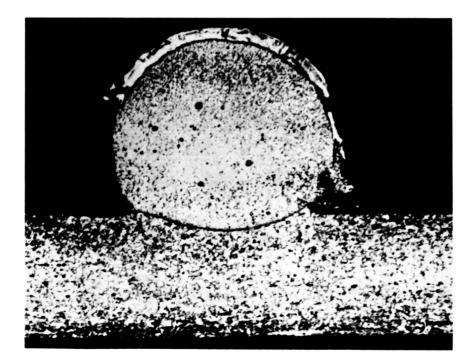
Weld joint 1.4.87; gold plated Dumet wire to Inco ribbon; sterilized; 150x magnification; Carapella etch (02331).
